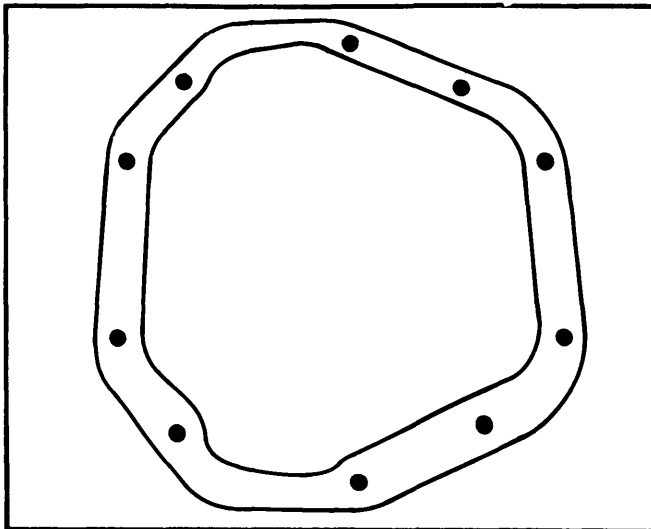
Spicer (Dana) Housing Cover Gasket for Identification Purposes
